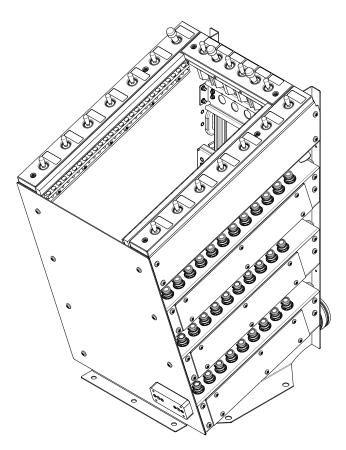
P132 CONSOLE ASSEMBLY (G10251)
